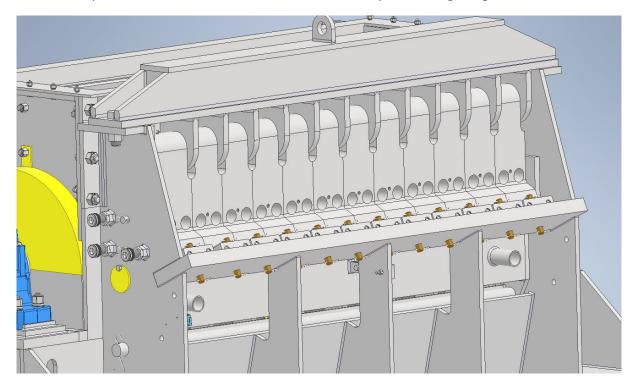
Complete Installation of Anvil Rack Assembly with Shear Bolts and Cotter Pins
